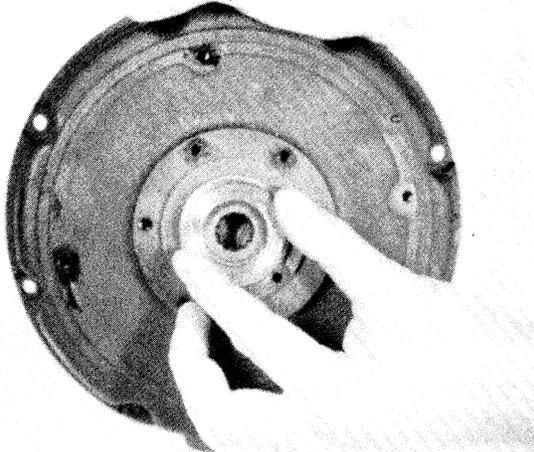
Checking Play between Drive Shaft and Mechanism Base
